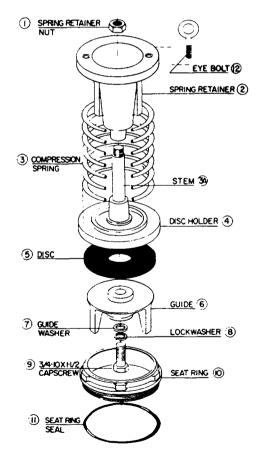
MAIN VALVE ASSEMBLY 8" & 10" MODEL 6CM
